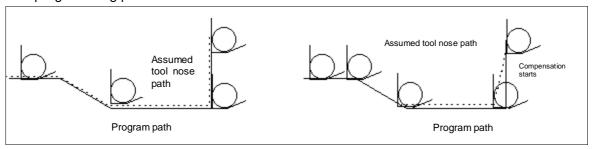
Tool Path if Programming via Assumed Tool Nose
